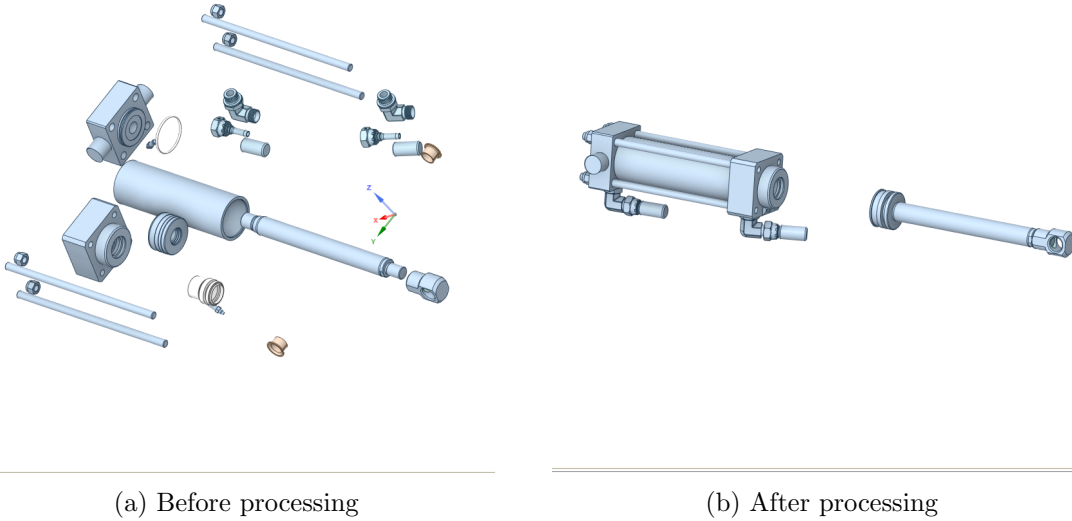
Exploded view of a cylinder before and after geometry processing. After processing, the cylinders consists of 2 parts.
